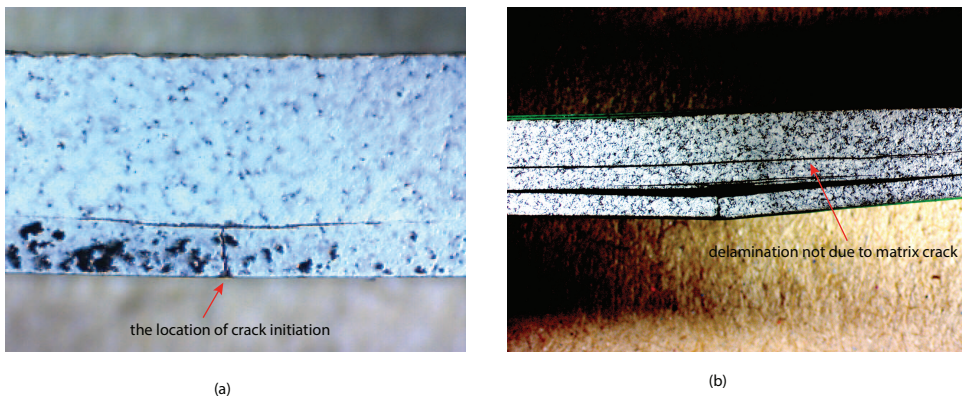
damage of the specimens after test (a) specimen 1 (b) specimen 2
